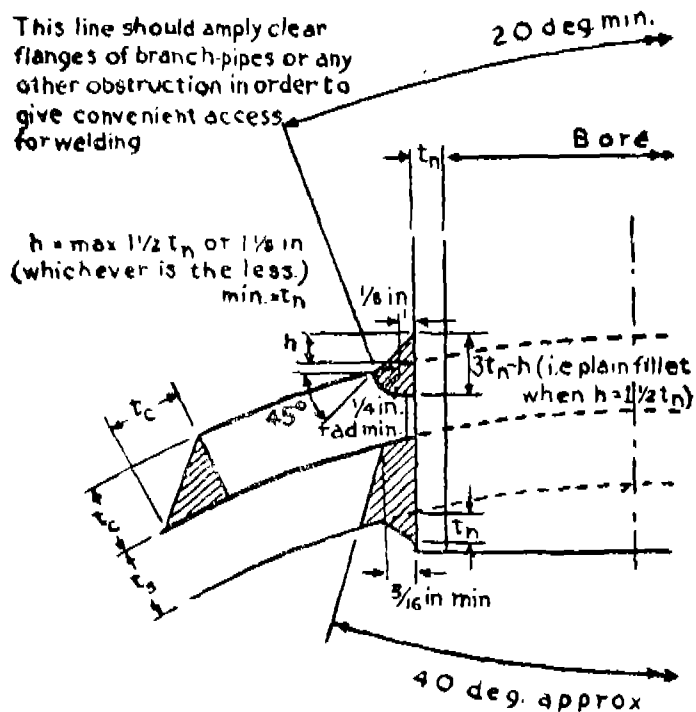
D Welded-in standpipe, or branch with compensating ring for standpipes and branches up to and including 4 in. bore.
